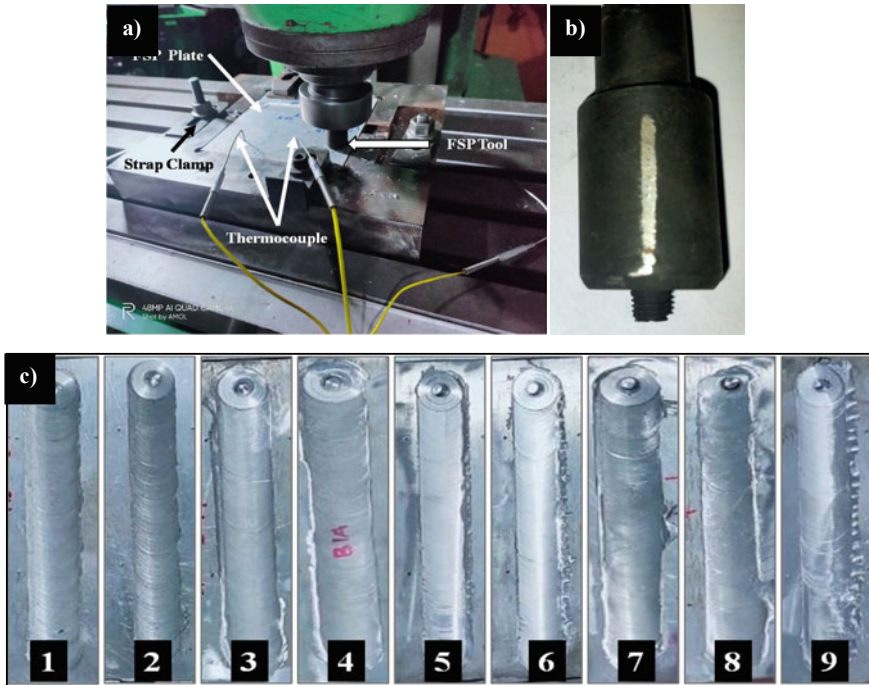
Experimental setup for FSP a Conventional milling machine, b FSP tool and c top surface images of the FSP specimen
